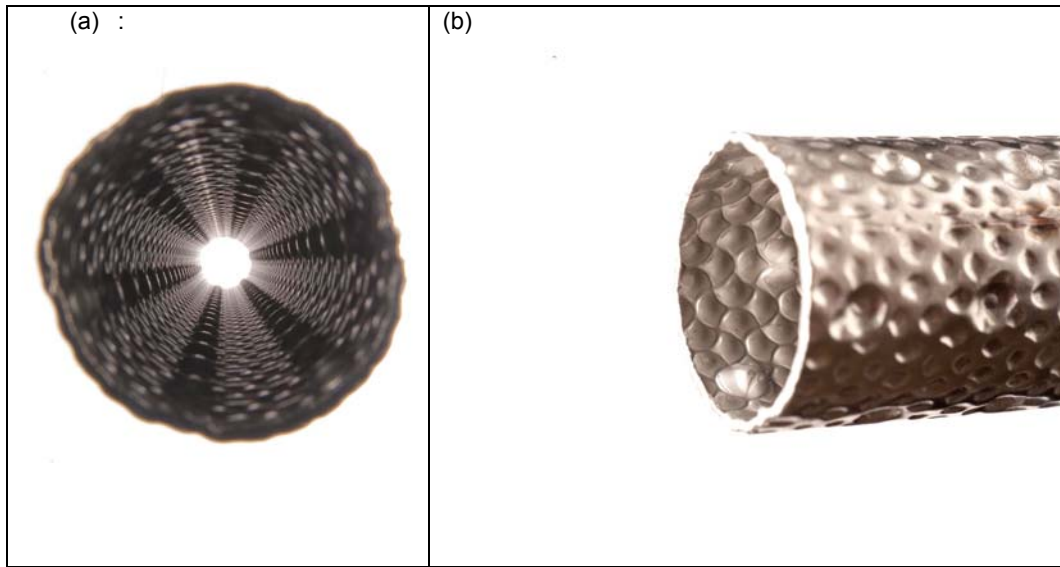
Details of the Vipertex 1EHT (Type 304 L stainless steel) Enhanced Tube (a) Cross sectional inner view (b) Outer surface.
